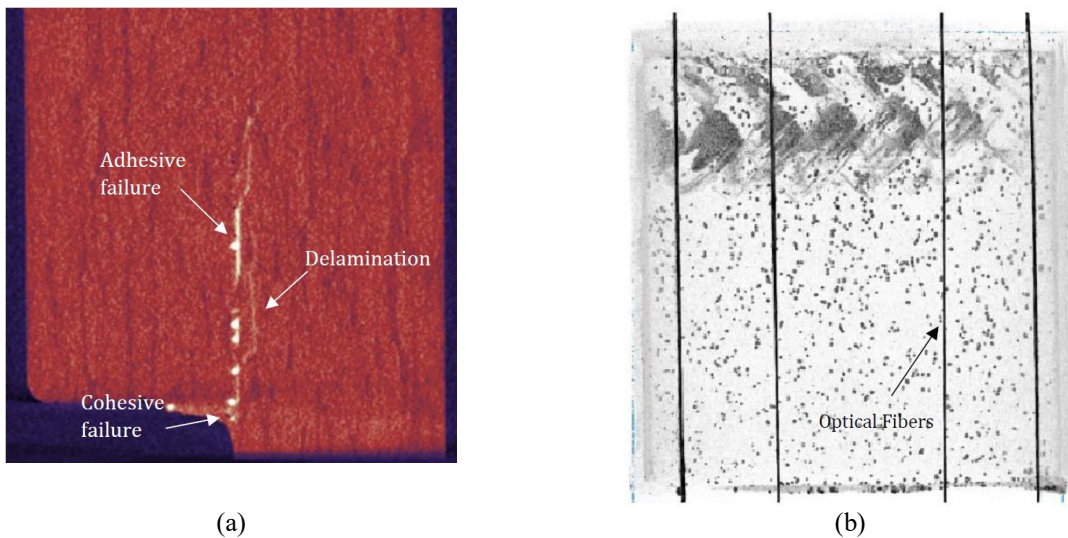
Damage analysis of the specimen at 320.000 fatigue cycles: a) side view; b) front view.
